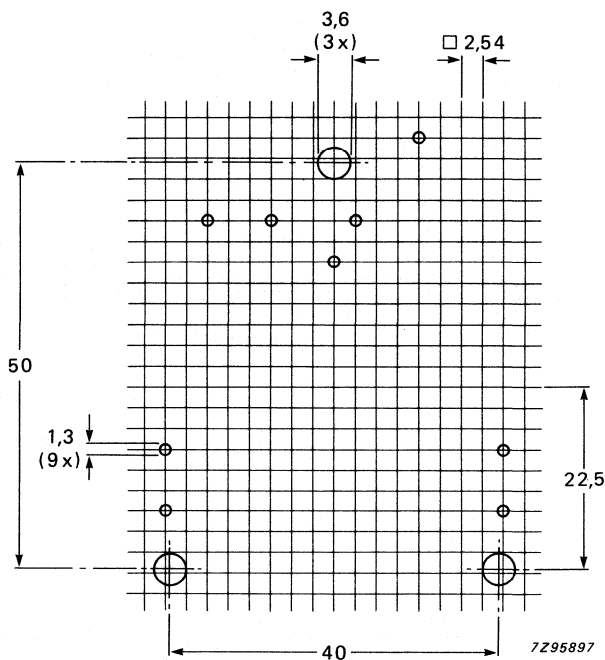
Hole pattern for mounting on a printed-wiring board (solder side).
